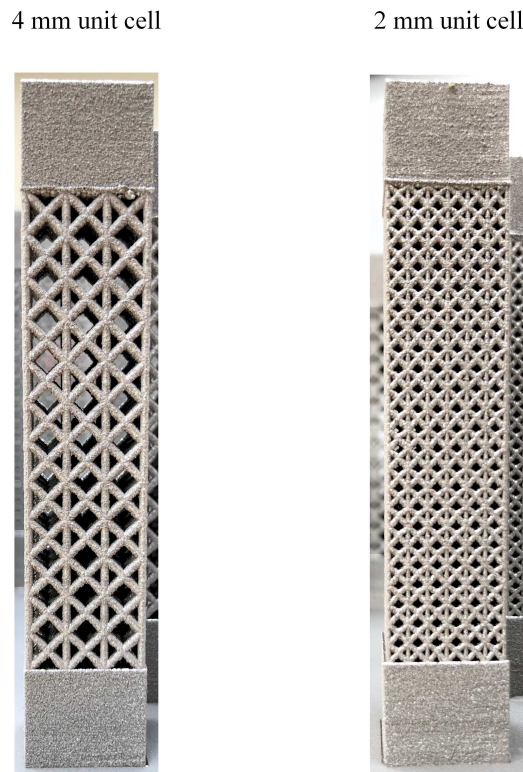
3<sup>rd</sup> DoE's specimens SLM 3D printing - detail views
